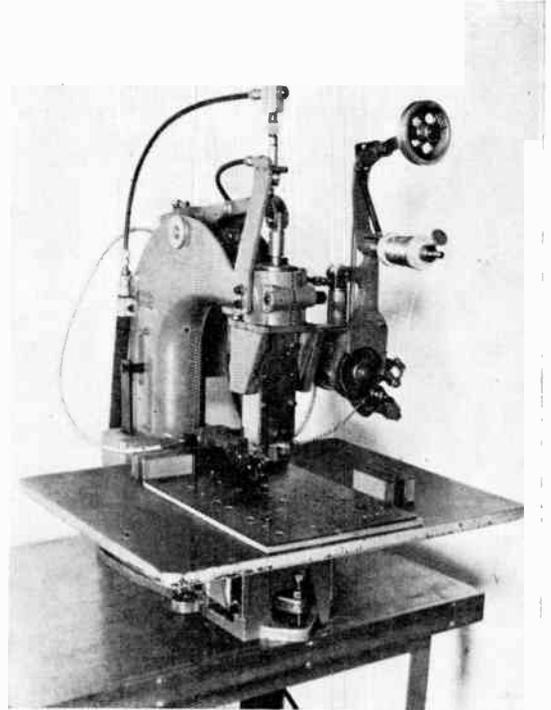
The Jumper Wire Inserting Machine (bench model) fitted with the optical locating attachment and magnetic stops, to position the printed wiring board accurately for the insertion of jumper wires.
